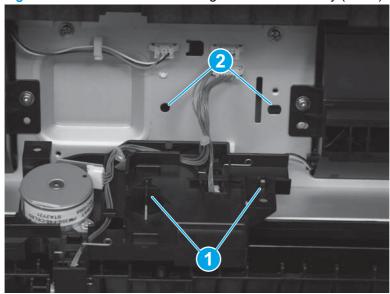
Remove the shutter gear holder assembly (5 of 5)
